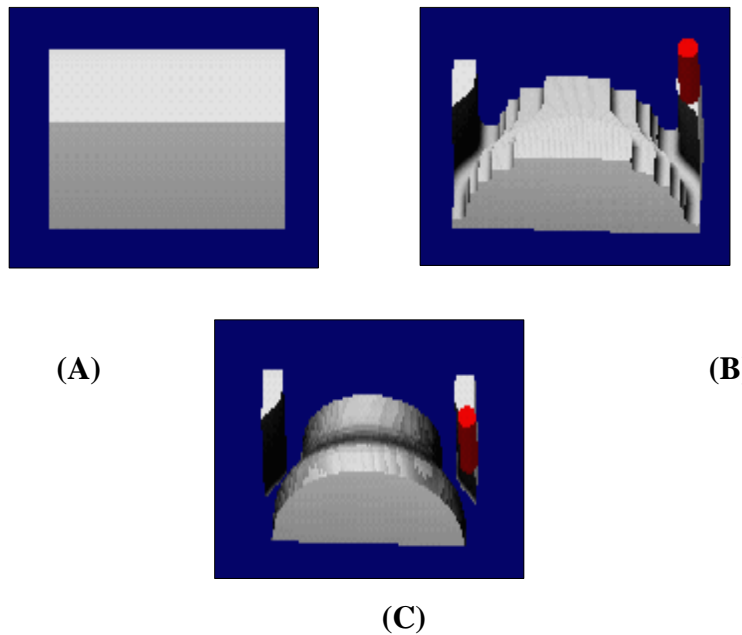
Using SURFCAM software to simulate the machining of interpolator Bezier surface (A) Workpiece (cibatool). (B) Roughing process. (C) Finishing process.
